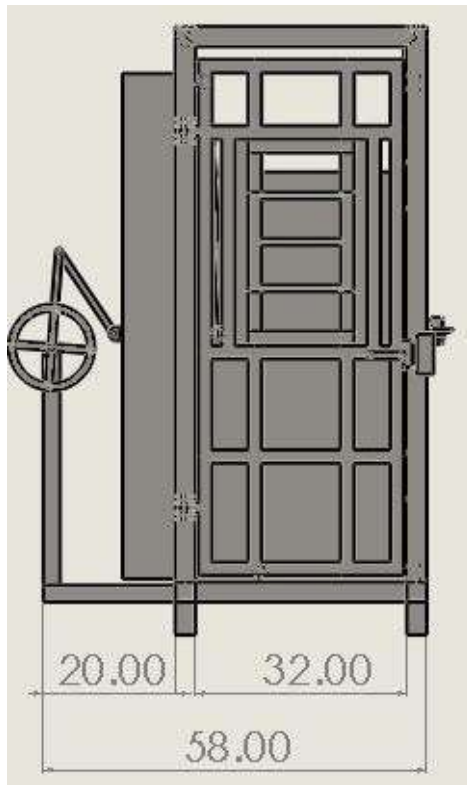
Image of front view of assembled chute model with dimensions (in inches)
